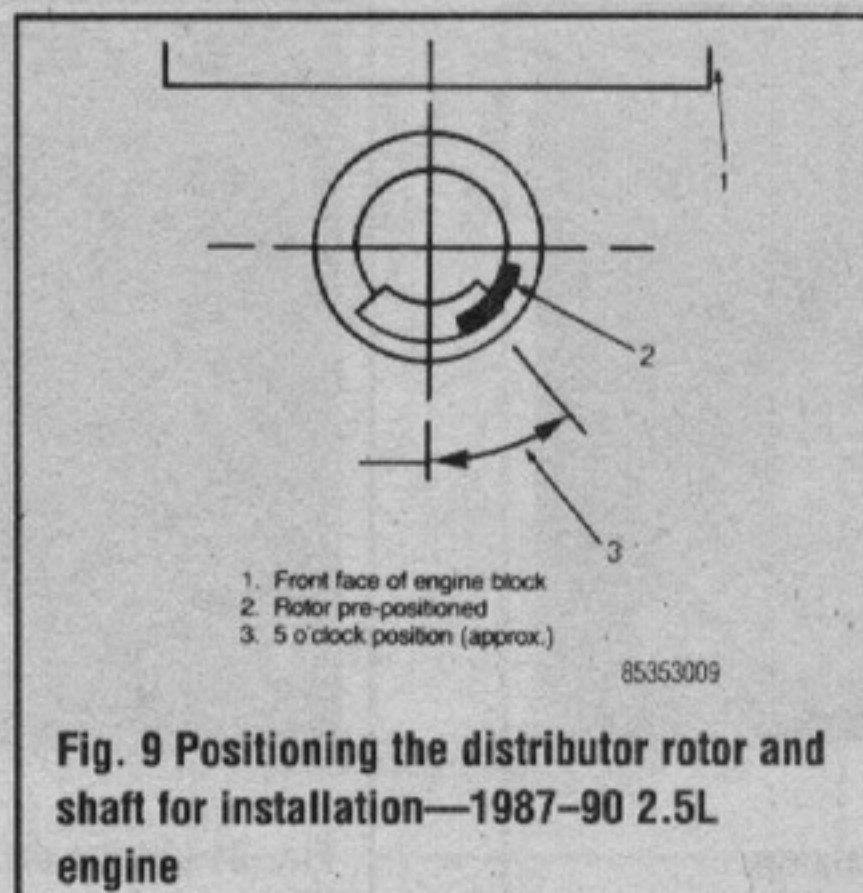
Positioning the distributor rotor and shaft for installation—1987-90 2.5L engine
